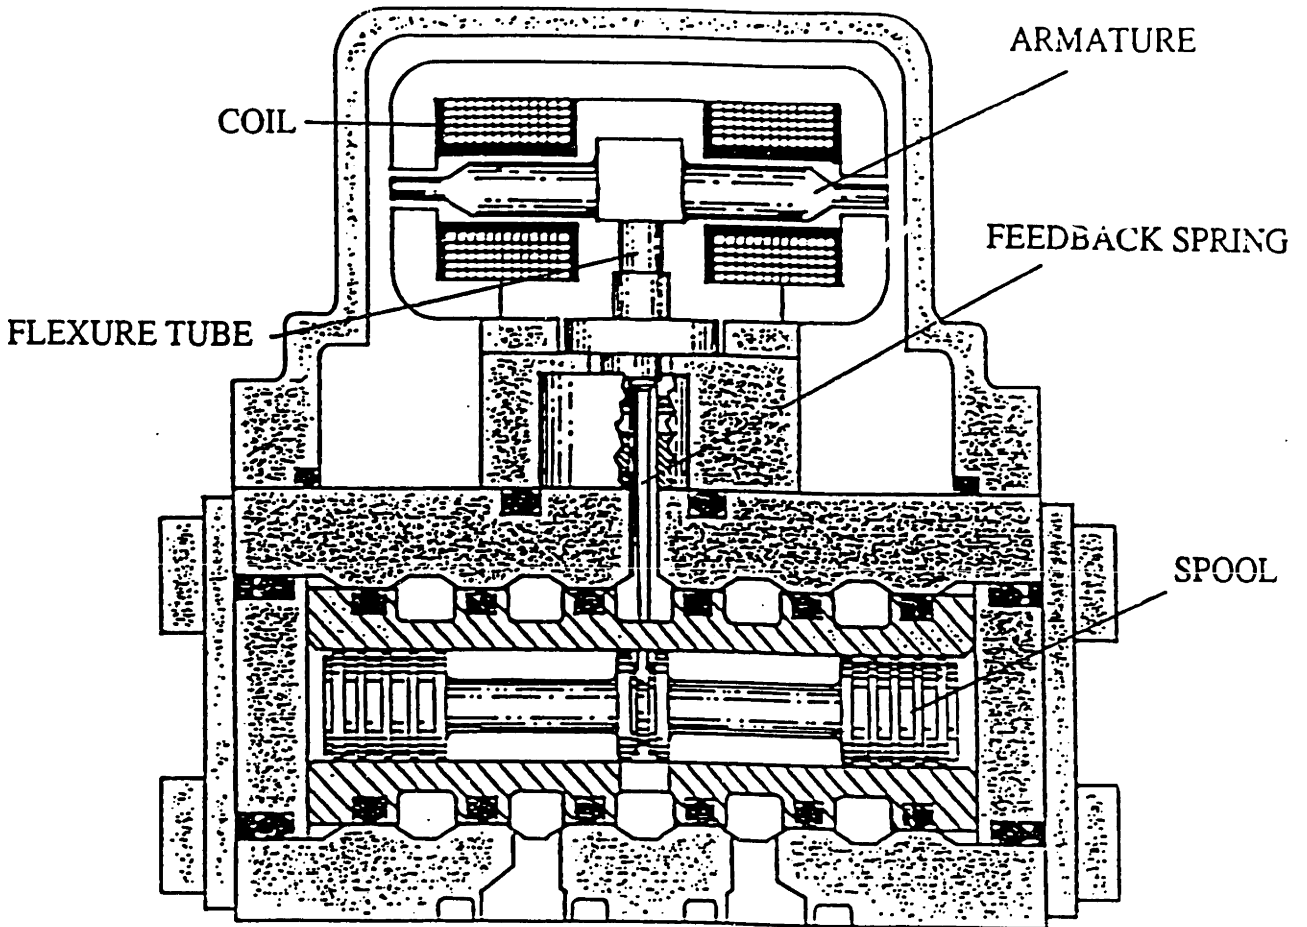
Cross Section of Jet Deflector Servovalve with a Single Torque Motor/ Hydraulic Amplifier Assembly. Courtesy Moog Inc. [8]
